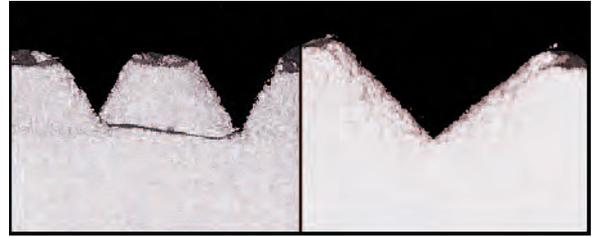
The 60-degree flank angle on the standard fastener exceeds the ductility limit of the material, damaging formed threads and creating debris. (L) Mag-Form fasteners compress rather than roll form threads, eliminating thread fractures and debris accumulation. (R)
